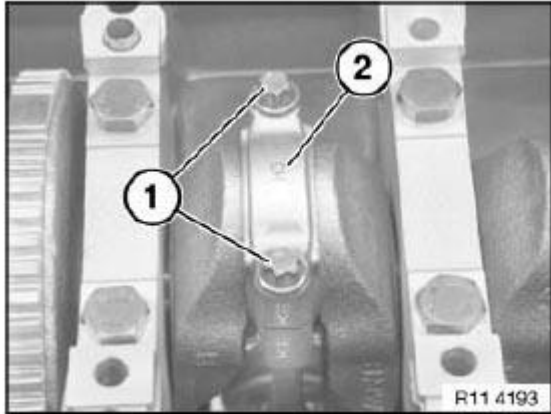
Identifying Bearing Caps And Connecting Rod Bolts
